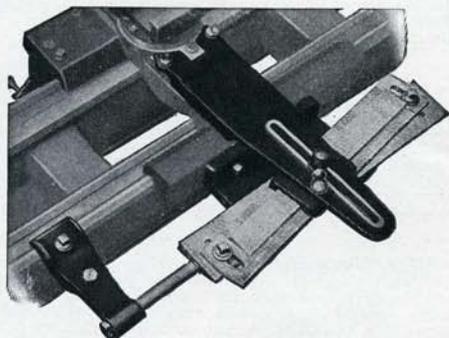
Graduated Taper Attachment for Turning and Boring Tapers.
